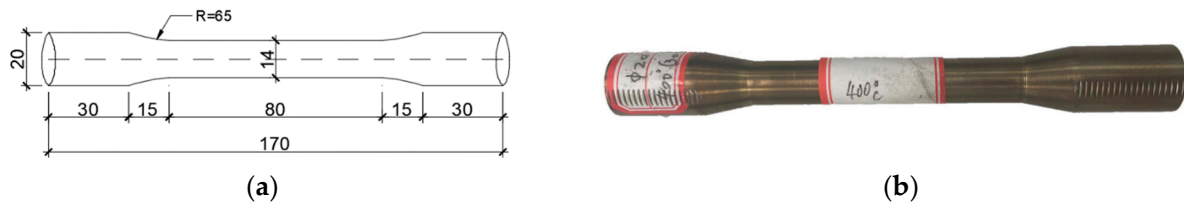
Specimen for low circumference fatigue test. (a) Specimen size. (b) Specimen.
